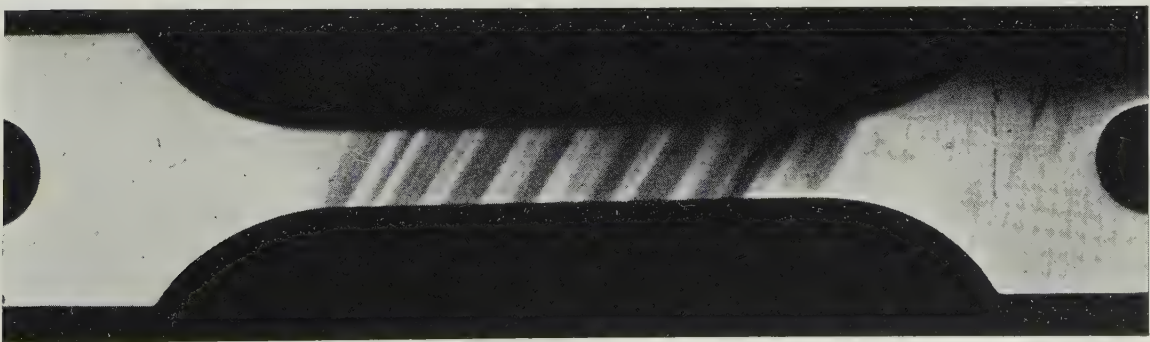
Type-*B* Markings in Specimen Machined from Commercial Aluminium-3½% Magnesium Alloy Cold-Rolled 10% to Suppress Type-*A* Markings and Pulled to Approx. 4% Extension on Amsler Machine. No ring markings. × 1.
